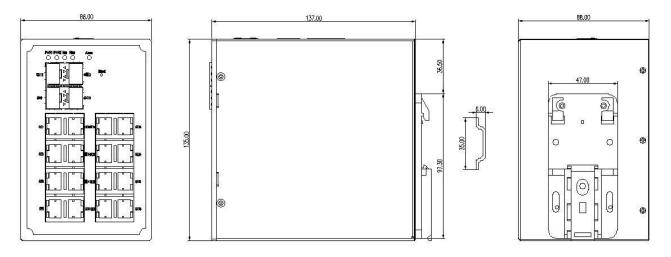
Dimensions for Large Products DIN-Rail Mounting (unit: mm)
